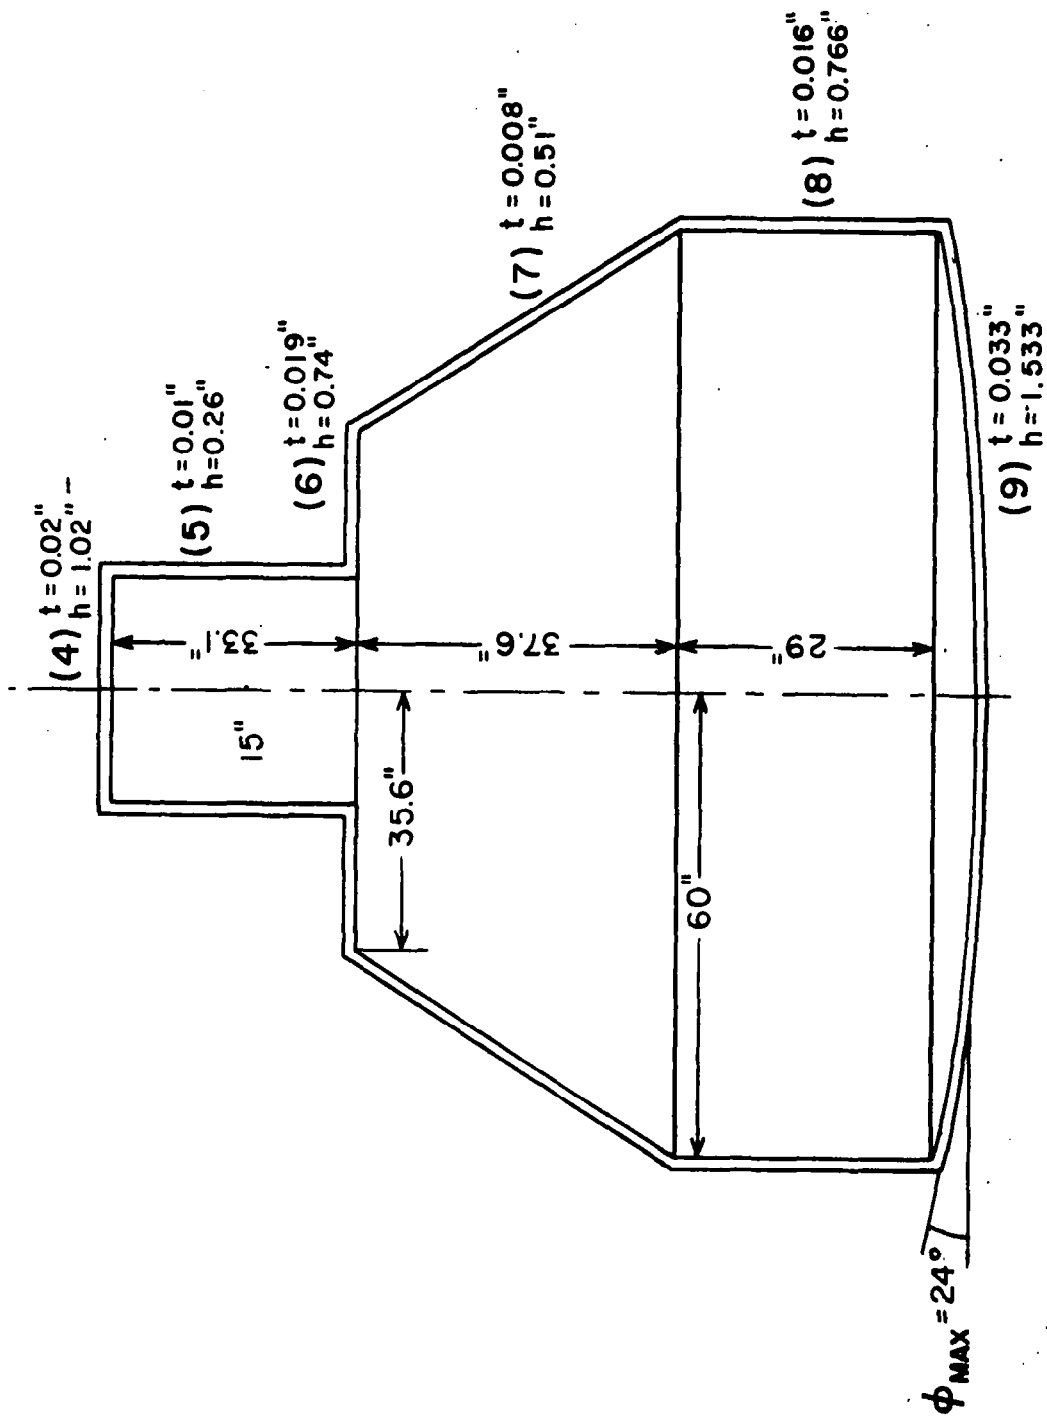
MAJOR STRUCTURAL SECTIONS OF INNER SHELL
